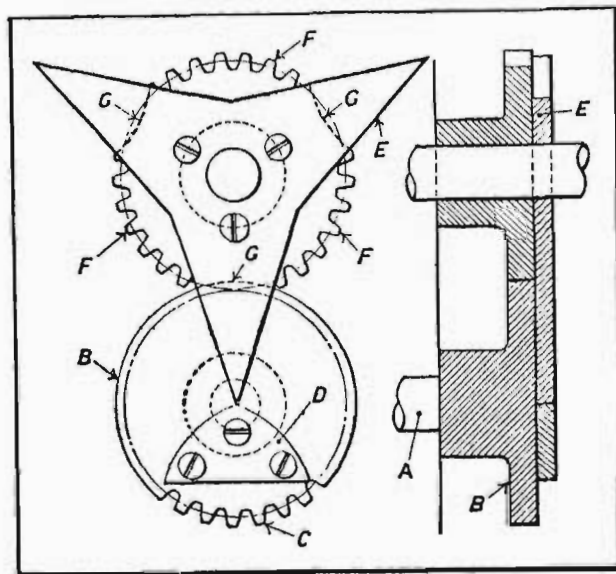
Indexing Mechanism Developed for Automatic Stamping Device.
